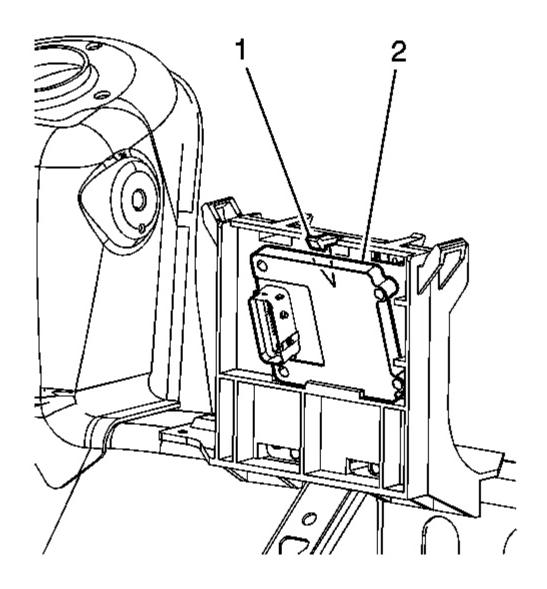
View Of ECM/TCM Retainer, Bracket & Retaining Tab Courtesy of GENERAL MOTORS CORP.
